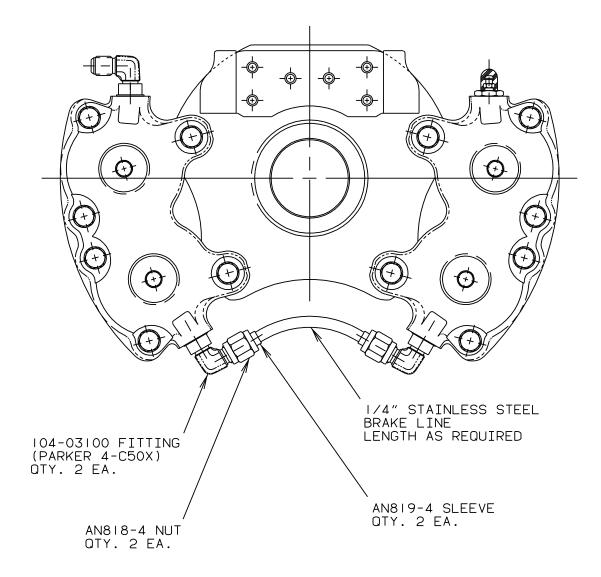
30-146 Brake Assembly - Connecting Hose Modification
